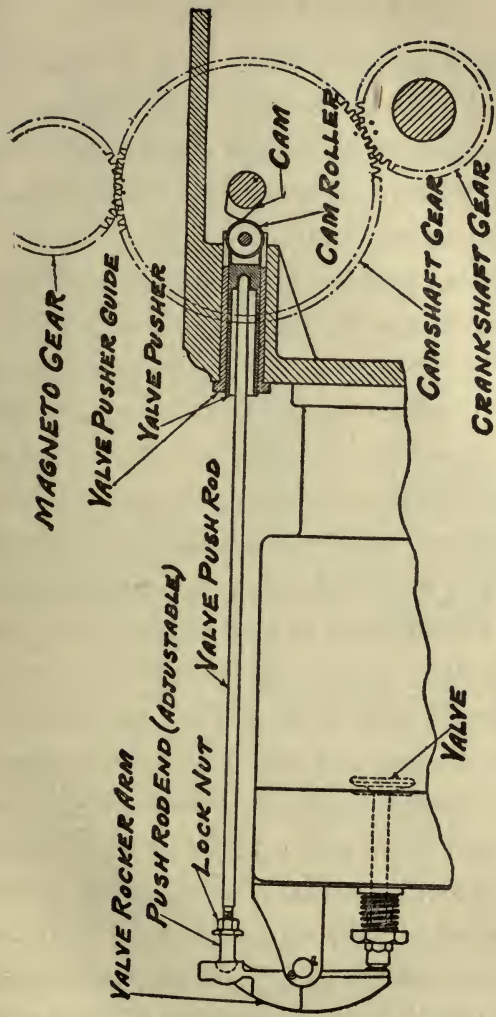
'HART-PARR,' VALVE MECHANISM
